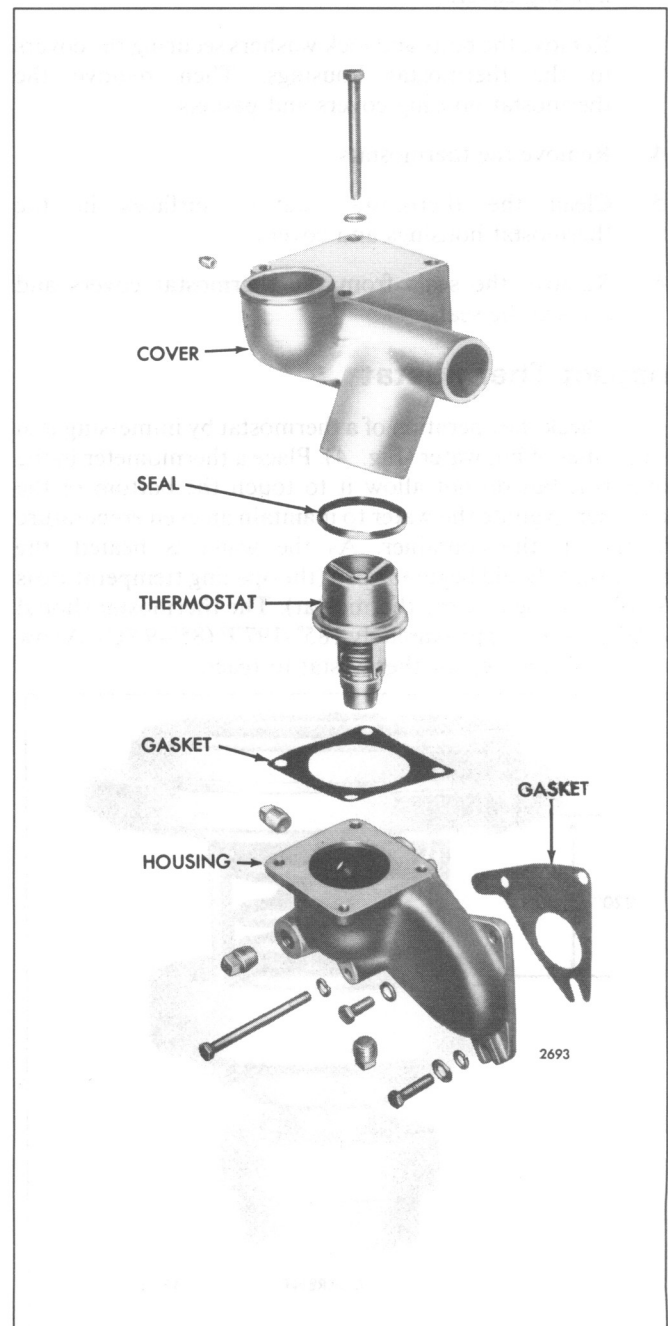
Typical Thermostat Housing and Relative Location of Parts
